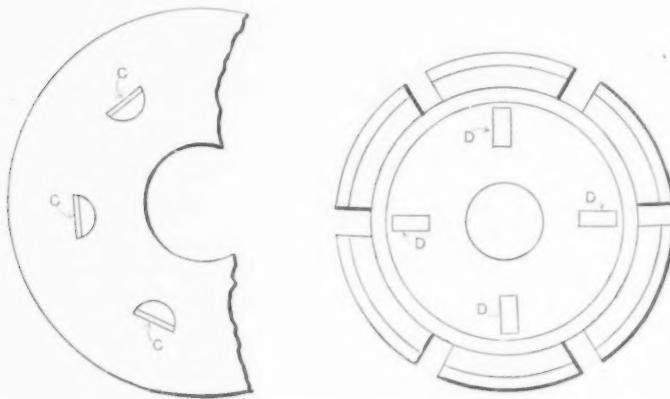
AND 3 SHOWING PROJECTIONS ON BRASS VALVE PLATE AND ON SPRING GUARD
